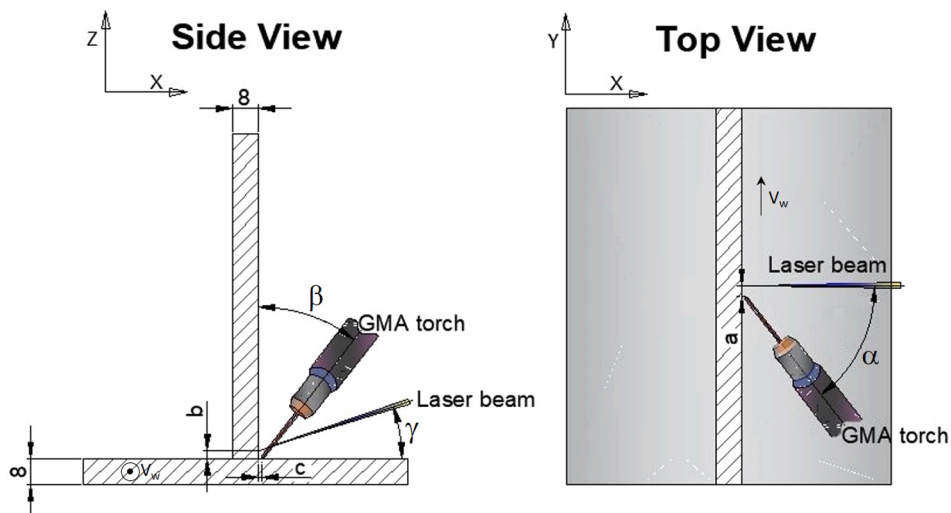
Geometric configuration of Laser & GMA sources to workpiece.
